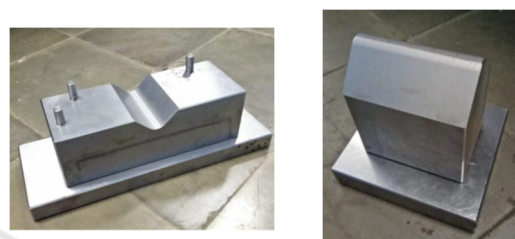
(a) The bottom of the tools, (b) The top of the tools.
